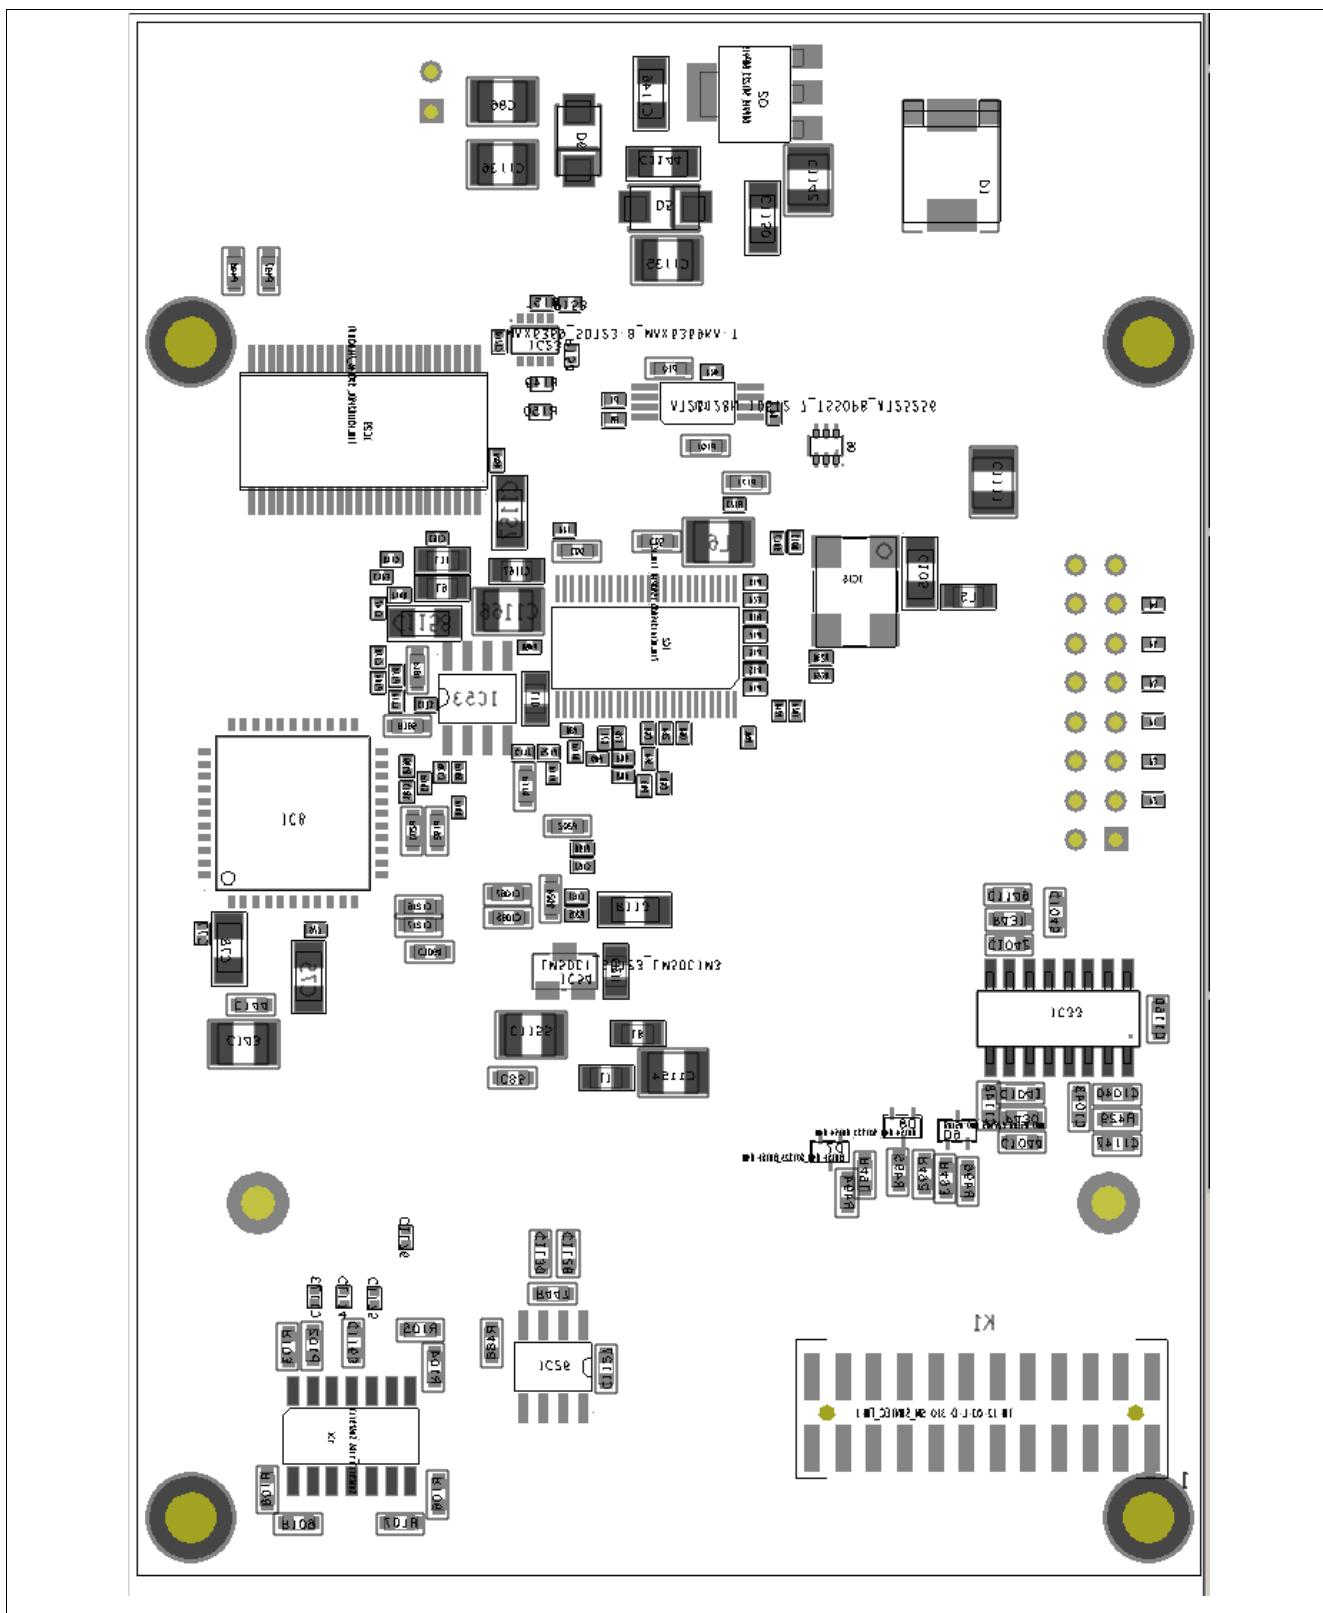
Assembly Drawing of the Logic Board v1.3b (Bottom)
